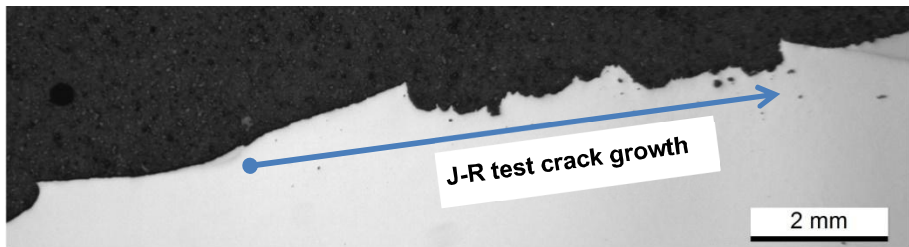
Optical microscope image showing the fracture surface cross-section, depicted in Figure 79 a. The crack initiates at this location in SA 508, propagates for about 2,5 mm until it deflects into the Alloy 52 side of the joint in which part the fracture surface shows a tortuous appearance. Voids, appearing dark in the image, have also formed beneath the fracture surface in Alloy 52.
